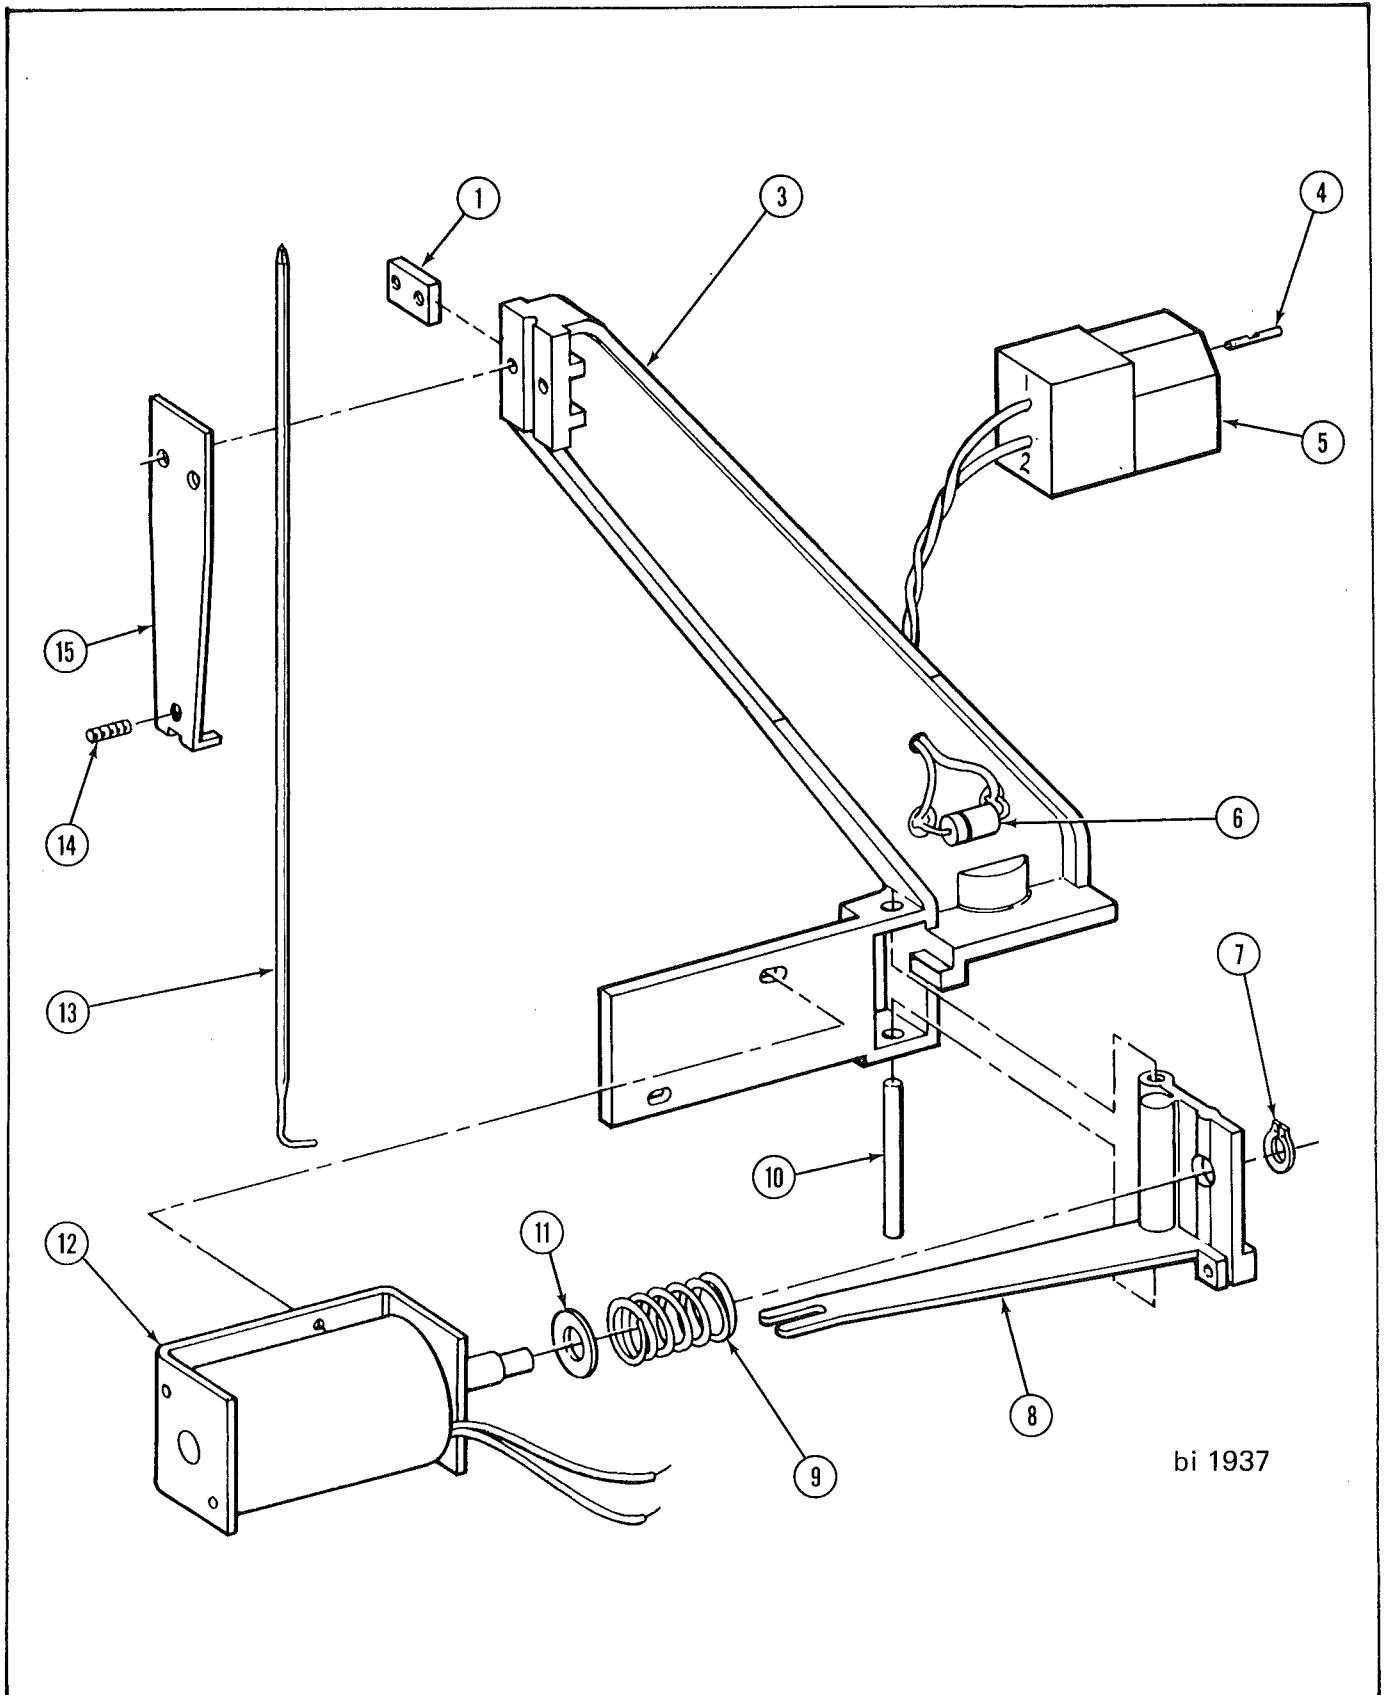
DRIVE AMPLIFIER ASSEMBLY (Sheet 2 of 2)
